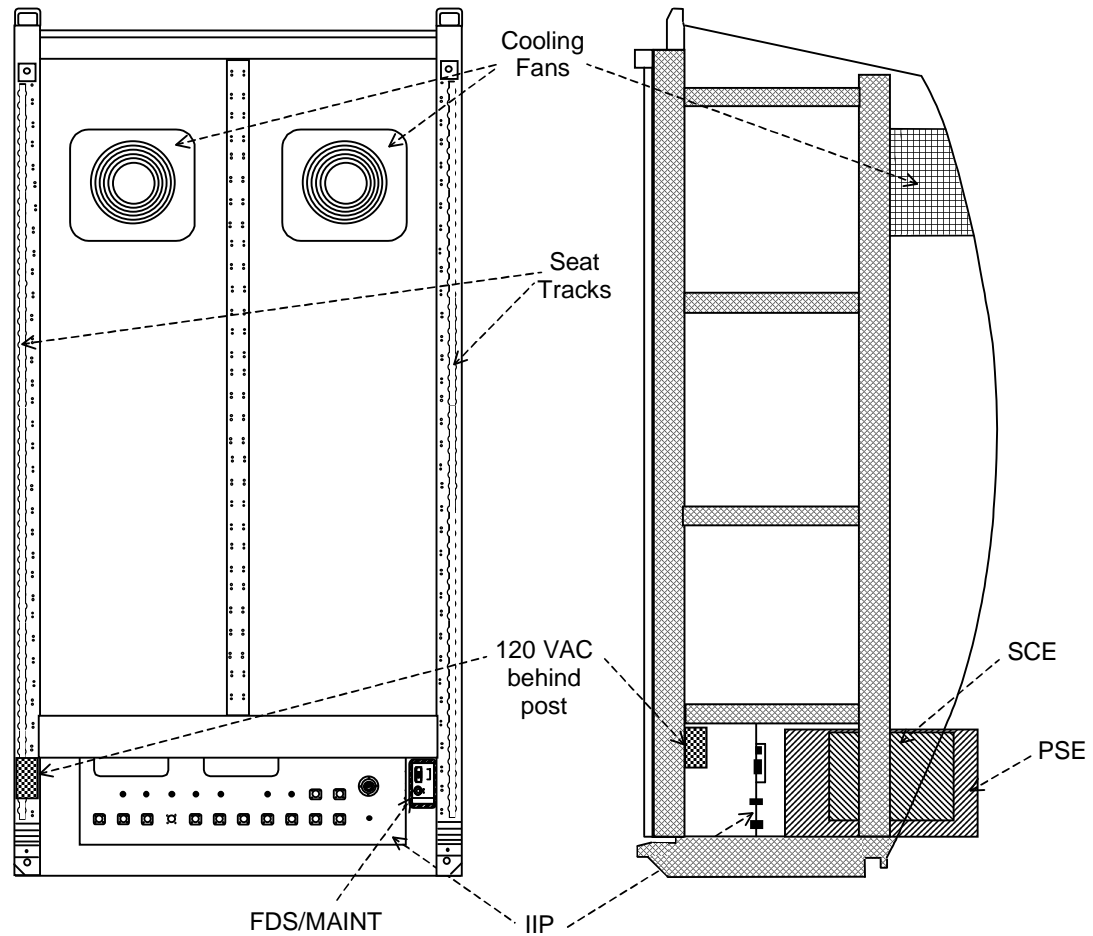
SSTF ISPR with Standard Equipment Installed
